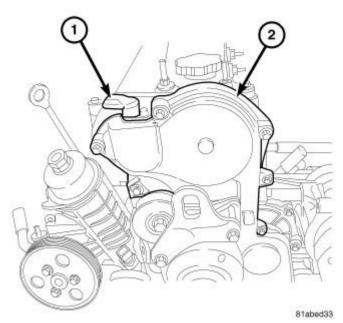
UPPER FRONT COVER Courtesy of CHRYSLER LLC
